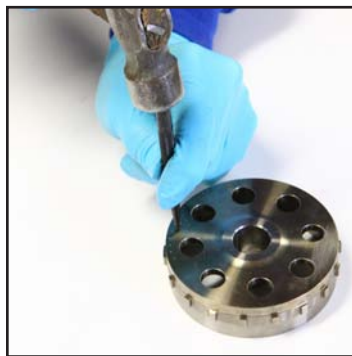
Use a center punch to make small dimples in the rotor surface.
